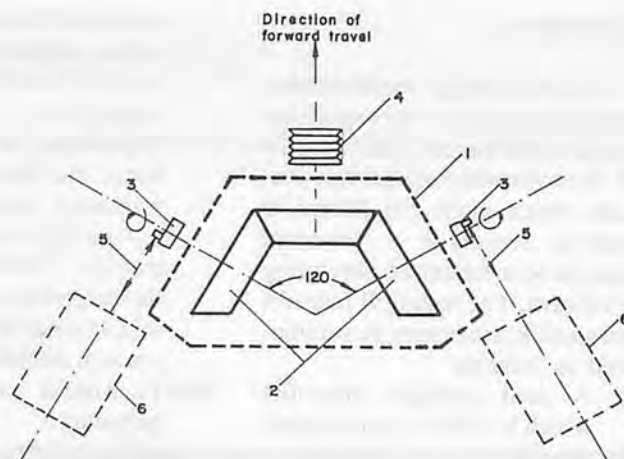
Sketch showing top view of the bevel gear drive for the reciprocation of the diggers. 1 — gear box; 2 — bevel gears; 3 — eccentric wheels on shafts of 2; 4 — multiple vee-belt drive from pto; 5 — line of action of connecting rod; 6 — slider mount of reciprocating diggers.
